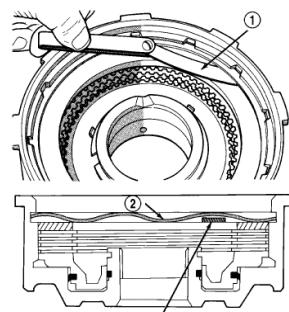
Typical Method Of Measuring Front Clutch Pack Clearance
